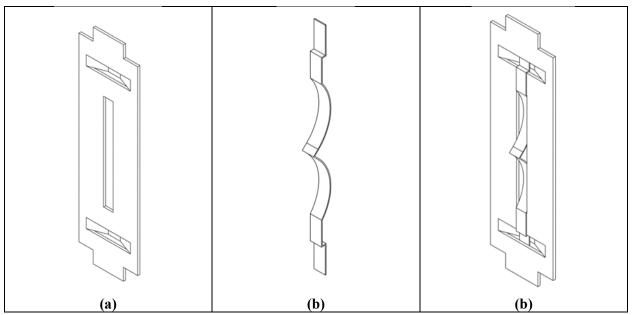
(a) Custom Spacer Grid with Dimple, (b) Custom Spacer Grid Compressed Spring, and (c) Custom Spacer Grid Panel with Dimple Weldment.
